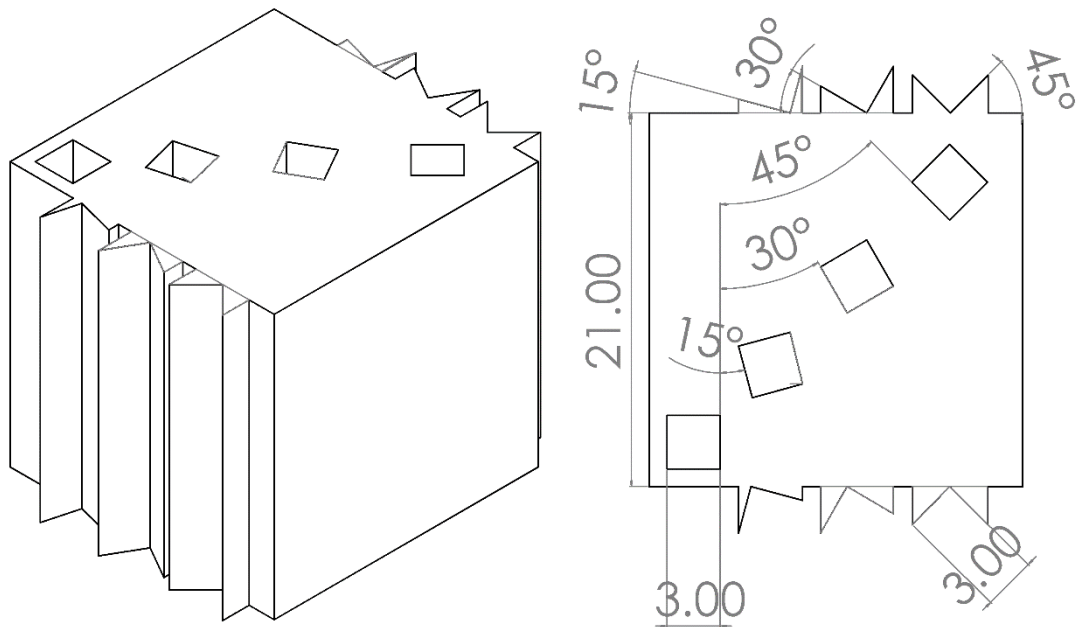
Isometric wireframe (left) and top-down wireframe (right) view of CAD of sample B. All linear dimensions are in millimeters.
